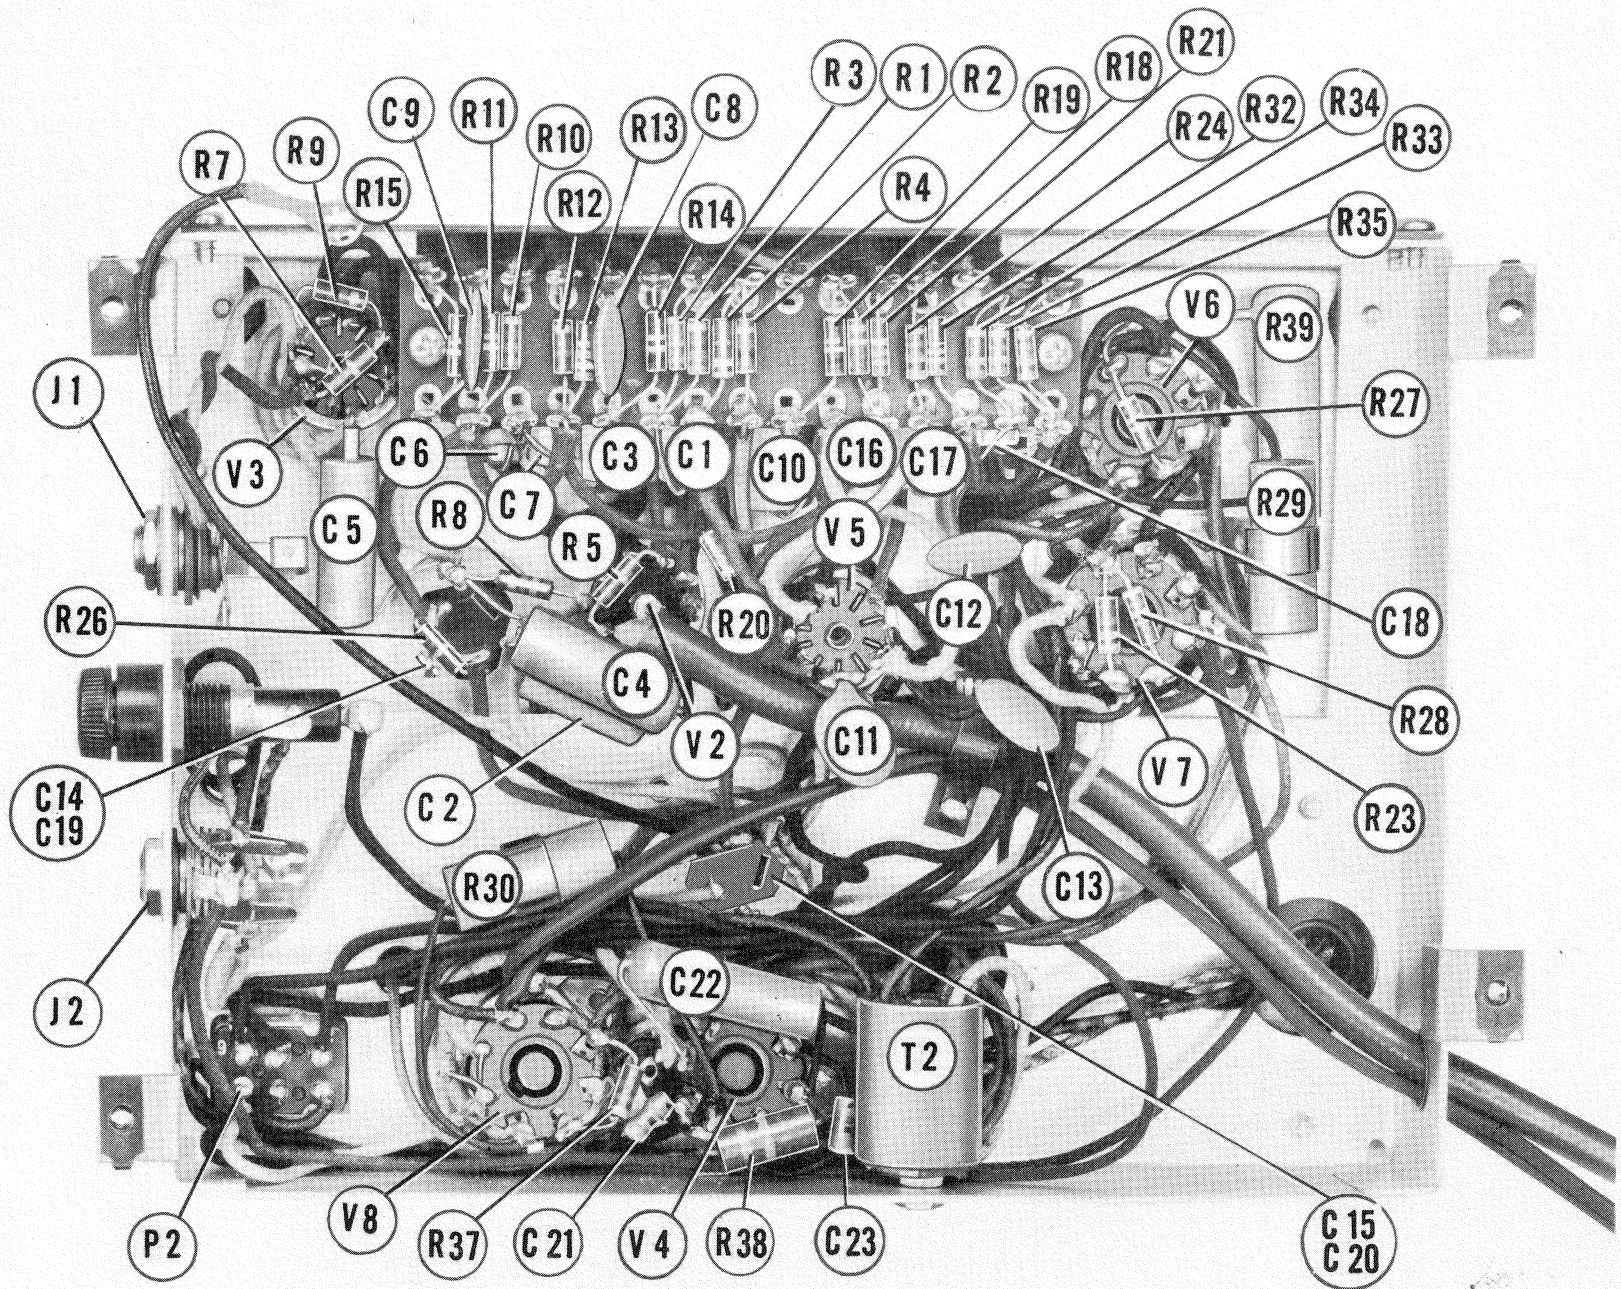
AMPLIFIER ASSEMBLY (P-30)
